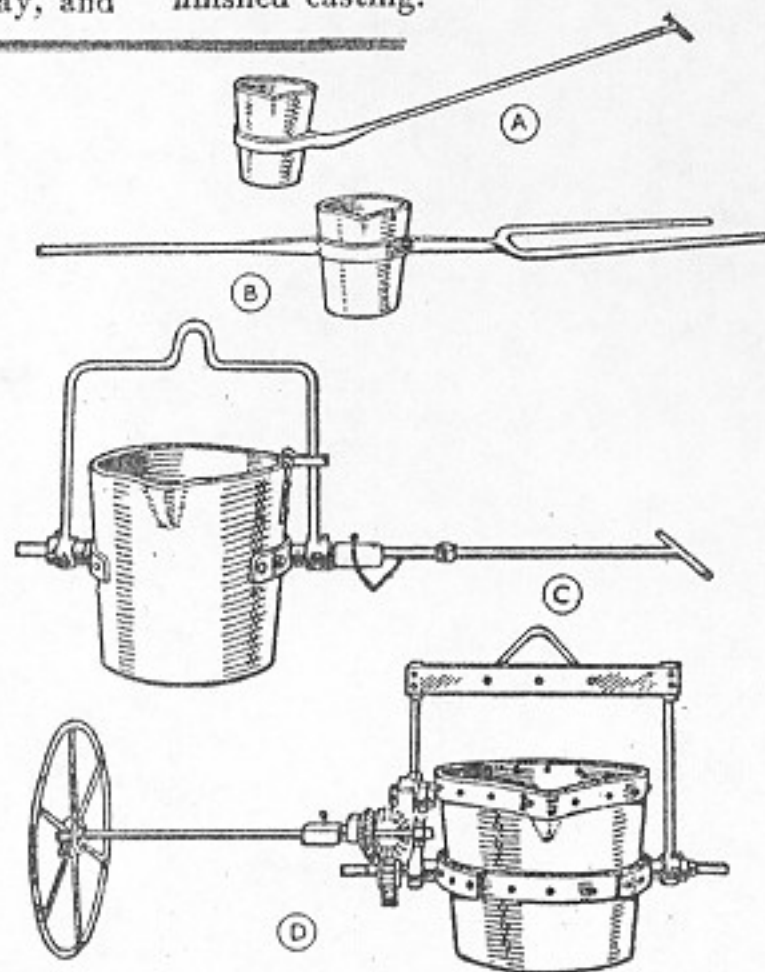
Types of ladles used in the foundry. A, hand ladle for light casts; B, two-man ladle for heavier work; C, crane ladle for casting up to a ton of metal; D, heavy crane ladle with geared tipping device, capable of holding from one to twelve tons of metal.
